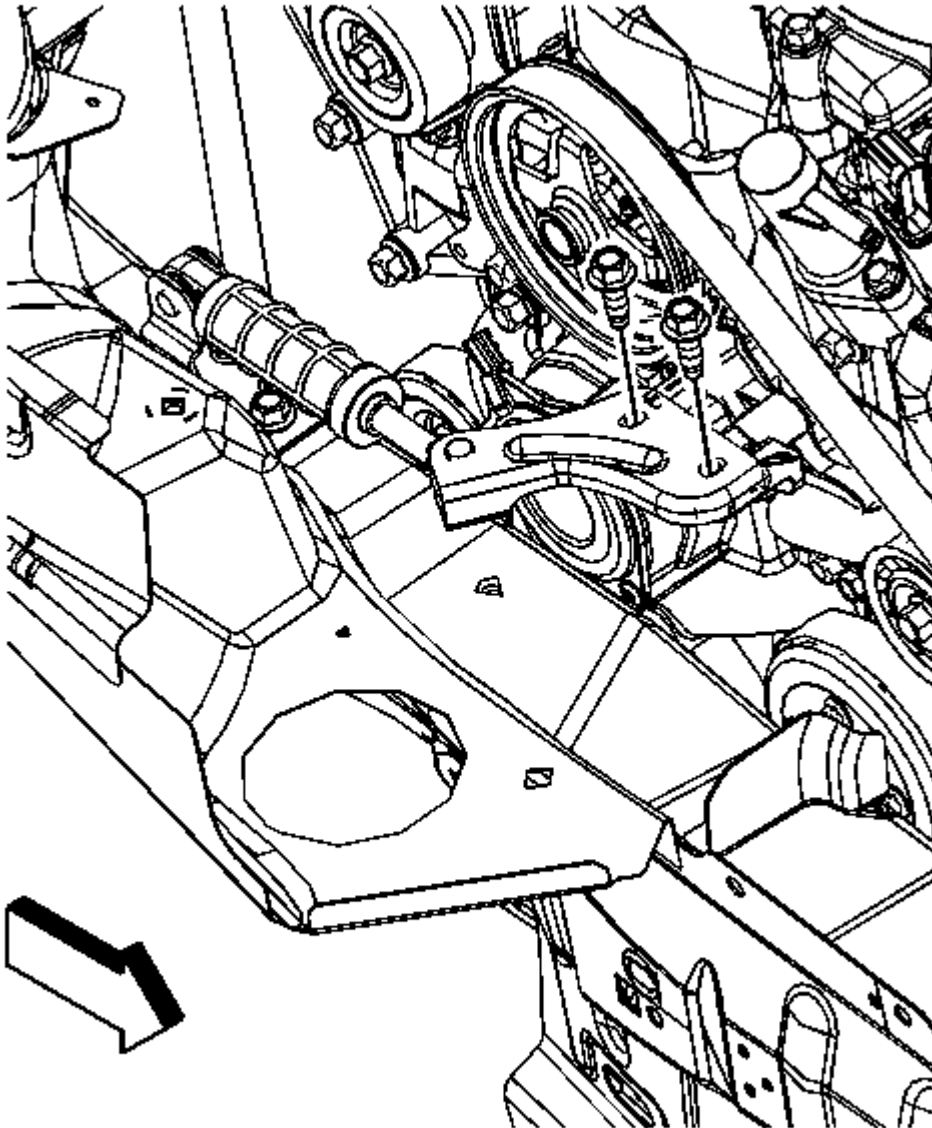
Engine Mount Snubber, Bracket & Bolts
